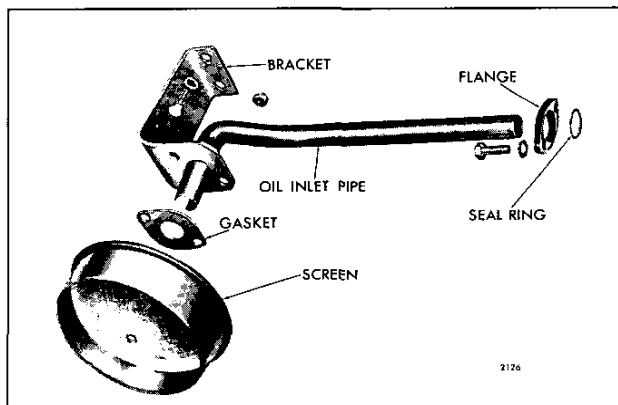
Oil Pump Inlet Pipe and Screen Details and Relative Location of Parts (In-Line Engine)
